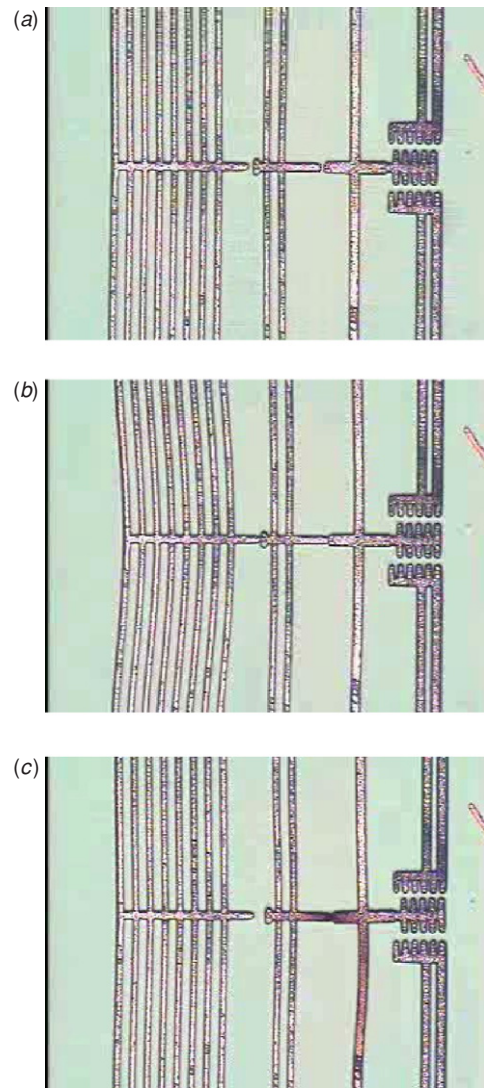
The micro resistance welding process. (a) Initial state. (b) Actuation unit pushes welding unit 1 to contact with unit 2. (c) The pressing force is removed and welding units 1 and 2 are successfully welded together.
